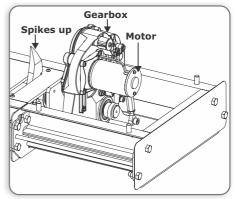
ADJUSTING THE SPIKES - INDEPENDENT DRIVE
